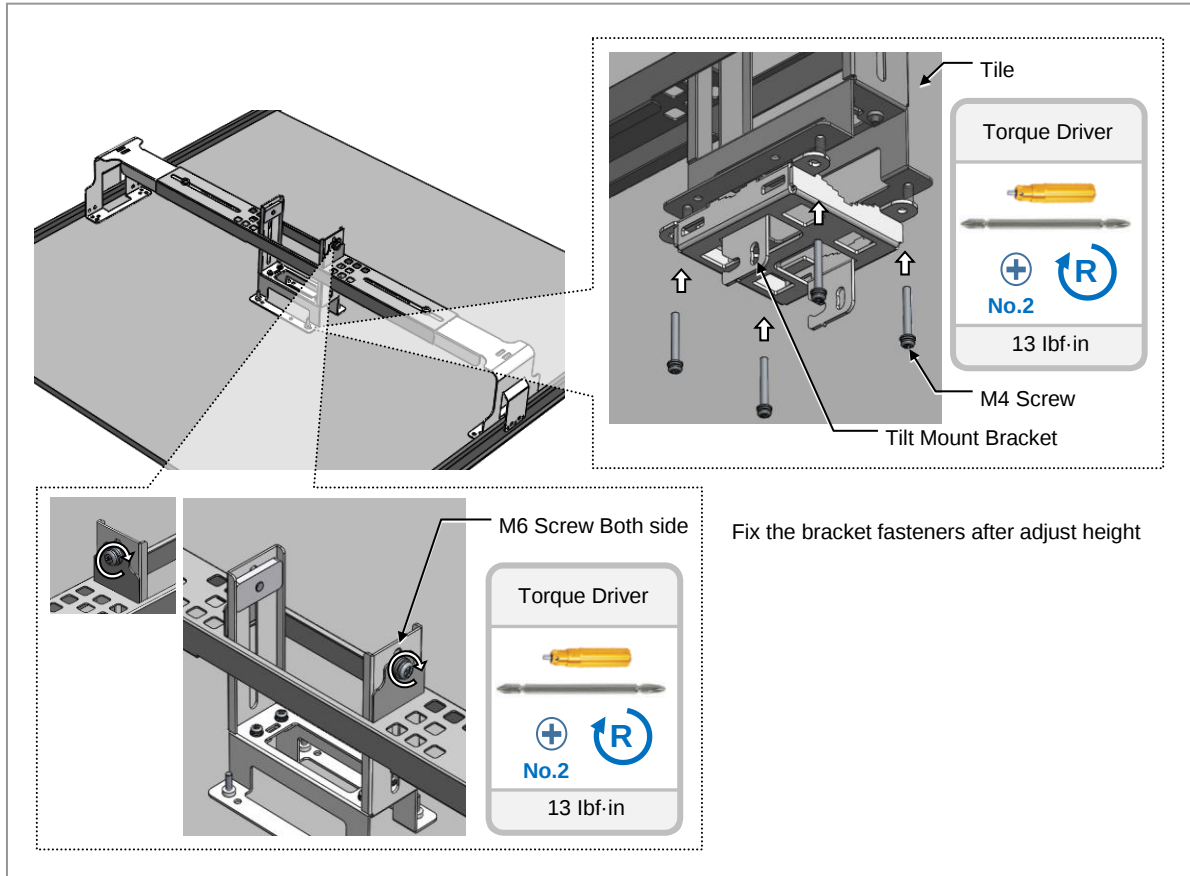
Fixing Tilted Ceiling Mount Bracket Assembly
